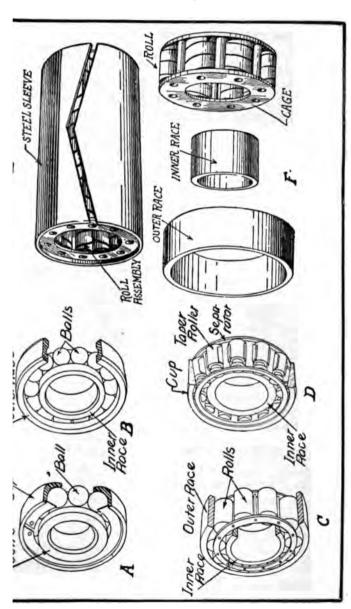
Outlining Conventional Types of Ball and Roller Bearings.
